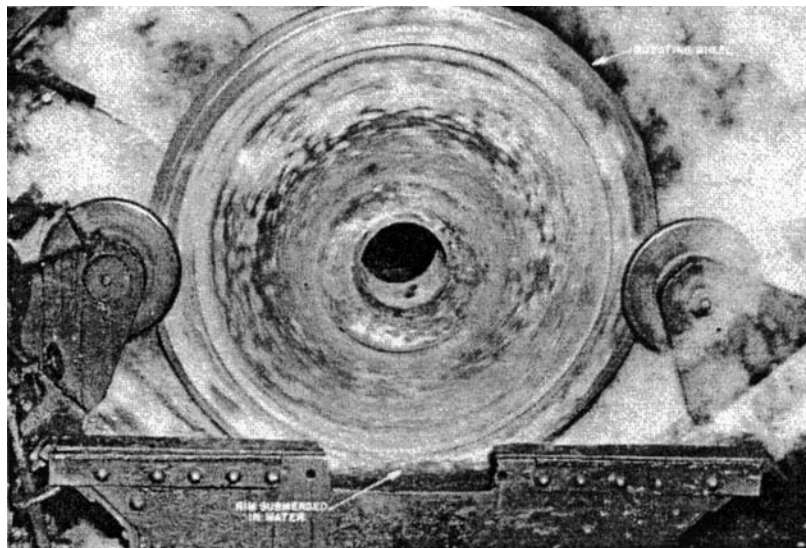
Improving photographic technique “Wheel undergoing quenching of the rim by being rotated in a special machine designed so that only the rim of the wheel contacts the quenching medium” [8th edition, p. 733].
